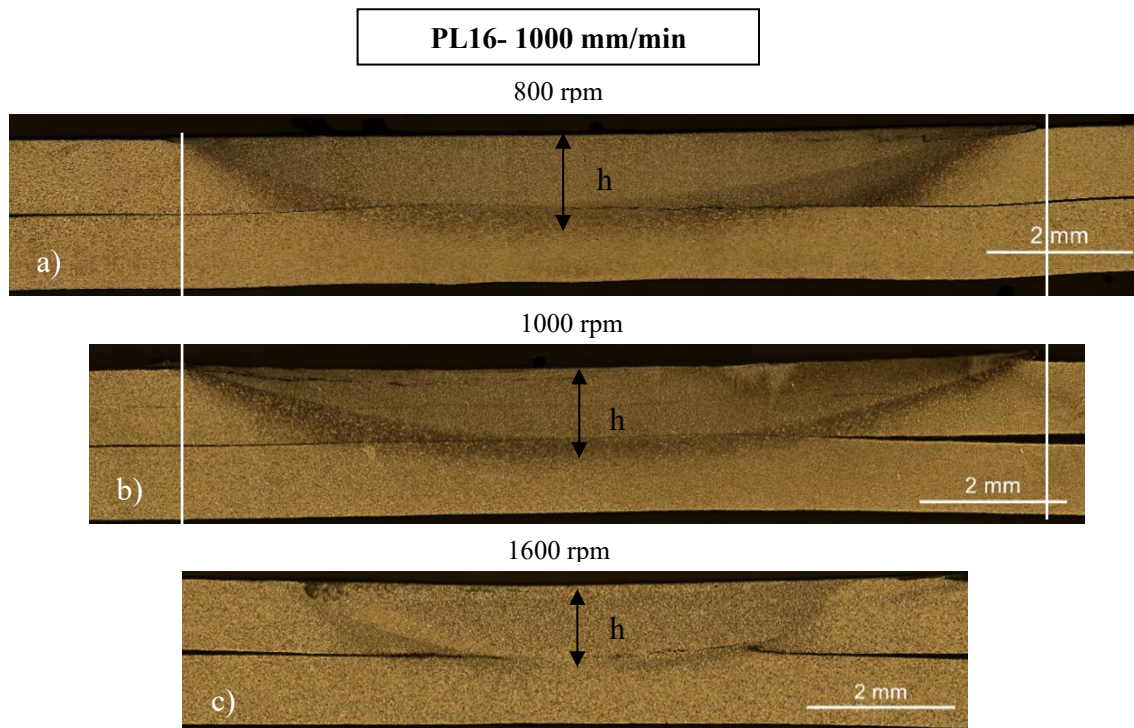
Cross-sections of the welds manufactured with PL16 tool, 1000 mm/min and varying the rotational speed.
